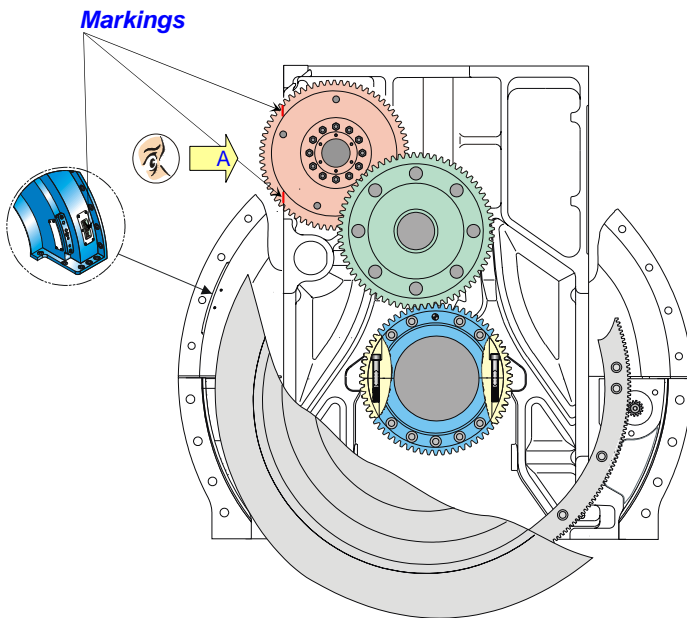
Check TDC markings on the flywheel and the camshaft gear
